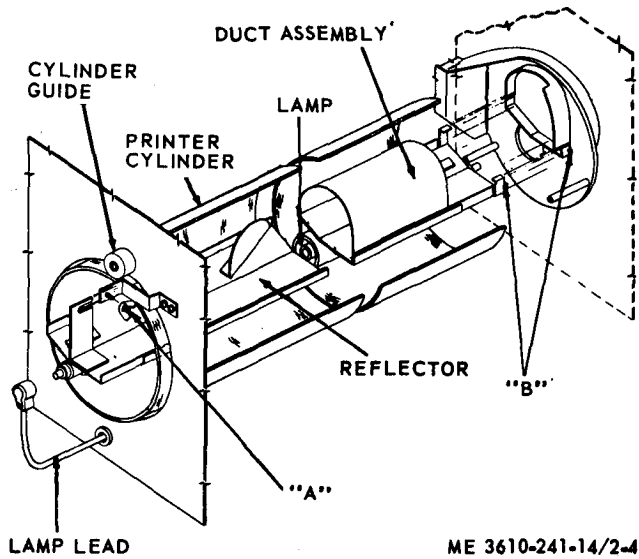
Lamp and lamp holder assembly, removal and installation.
